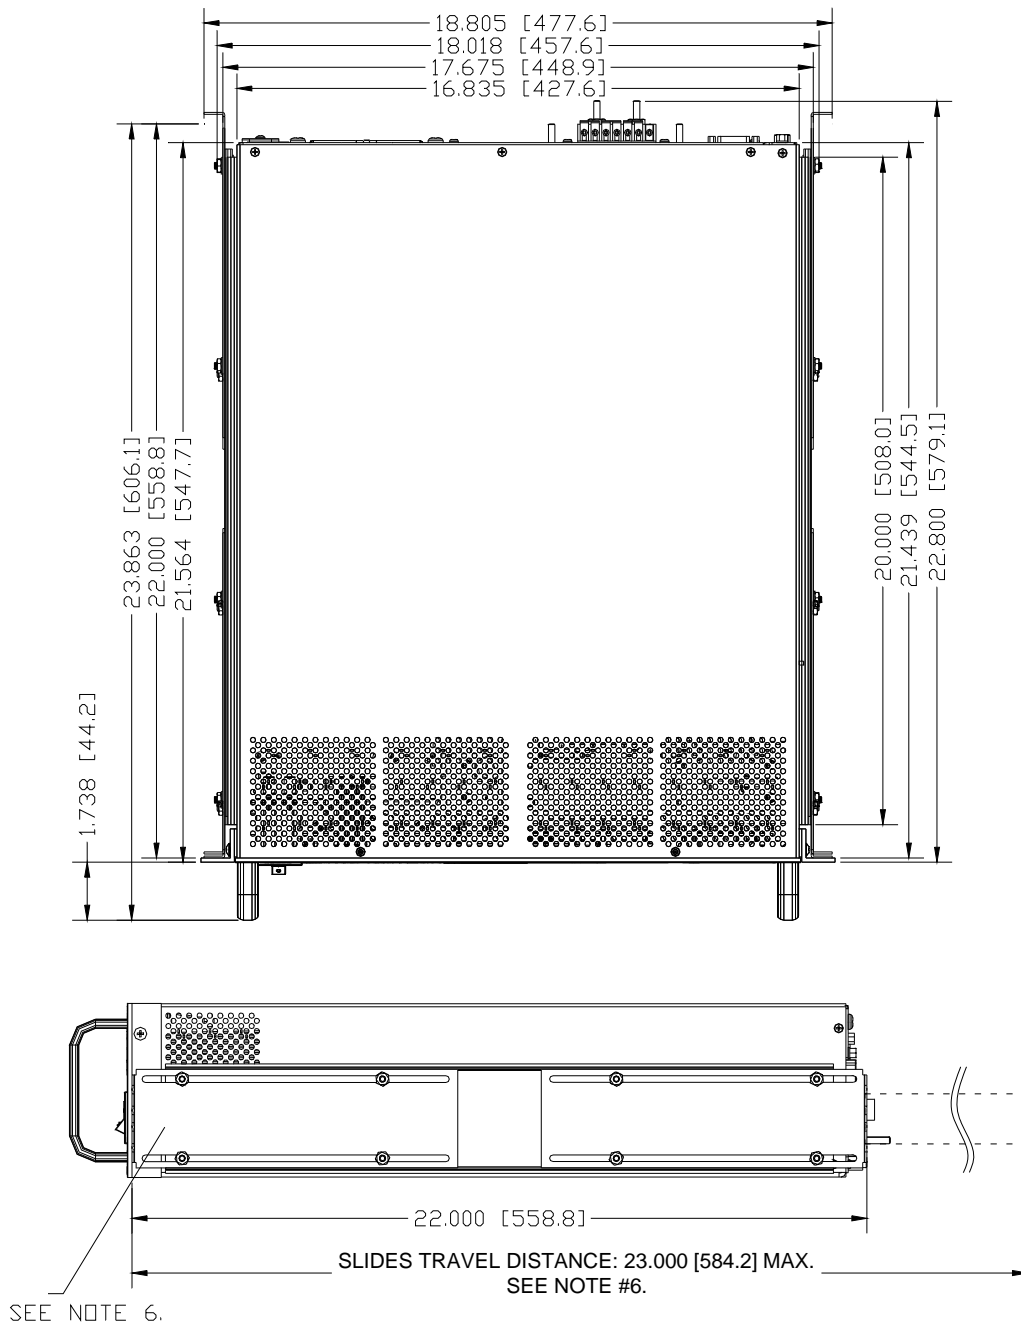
OUTLINE DRAWING (SHEET 2 OF 2)
